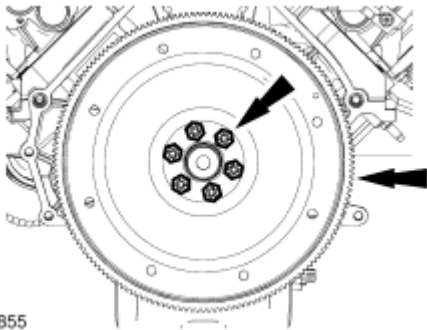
Removing Bolts And Flexplate Or Flywheel
